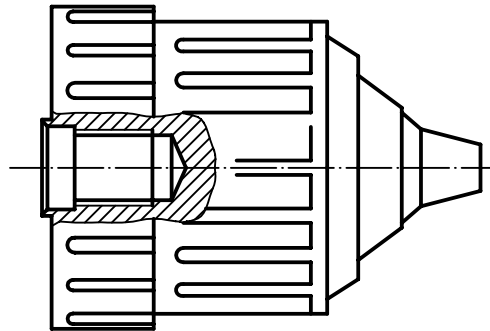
Three-jaw drill chuck — Internal thread mount type
